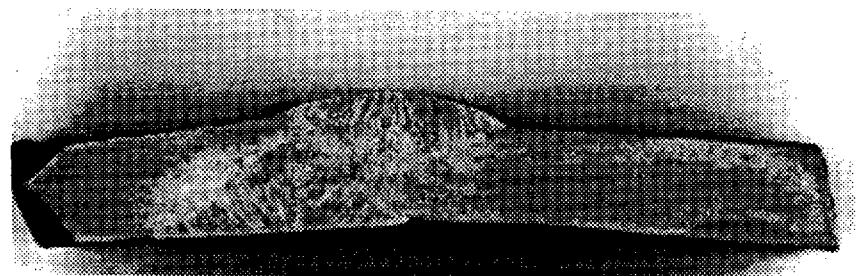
Out-Of-Line Weld Beads (or Off Seam)
